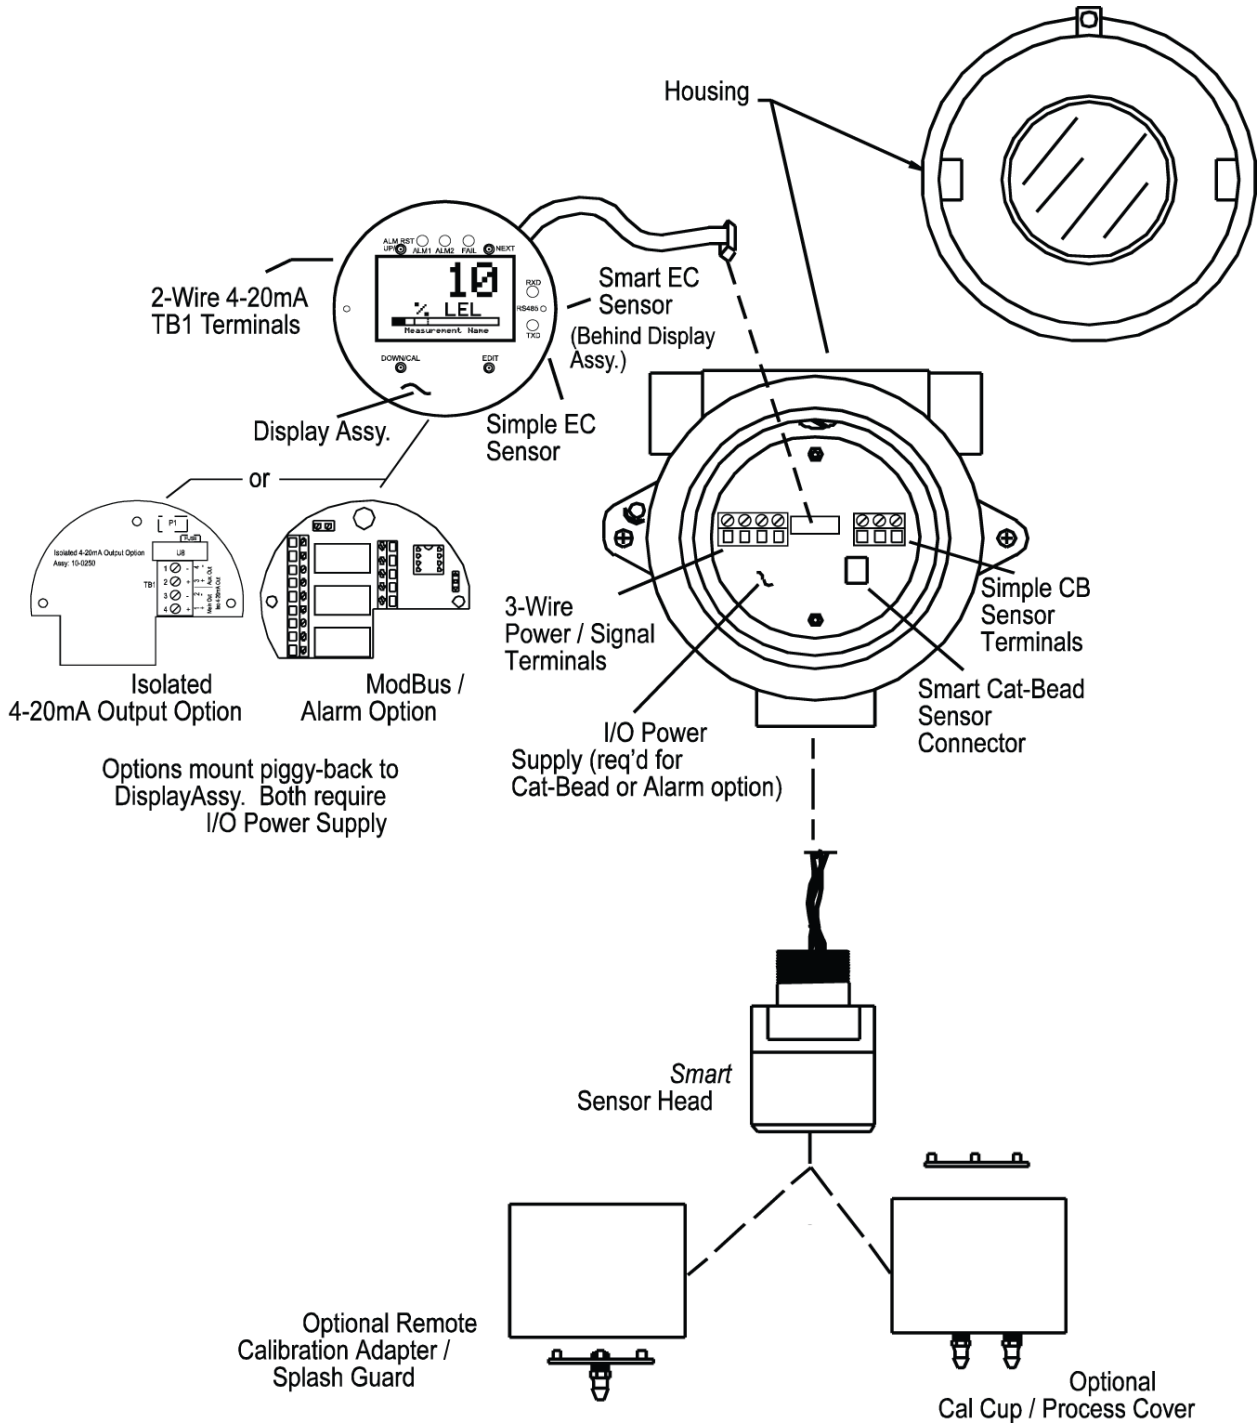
Outline Drawing (Stand-alone and Wired Version)
